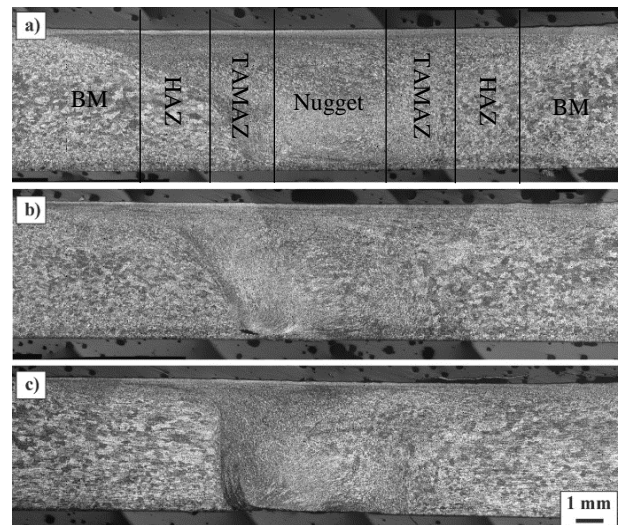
Macroscopic depiction of welds welded with concentric reservoir tool; welding speeds: a) 17 mm/min , b) 46 mm/min , c) 91 mm/min .
